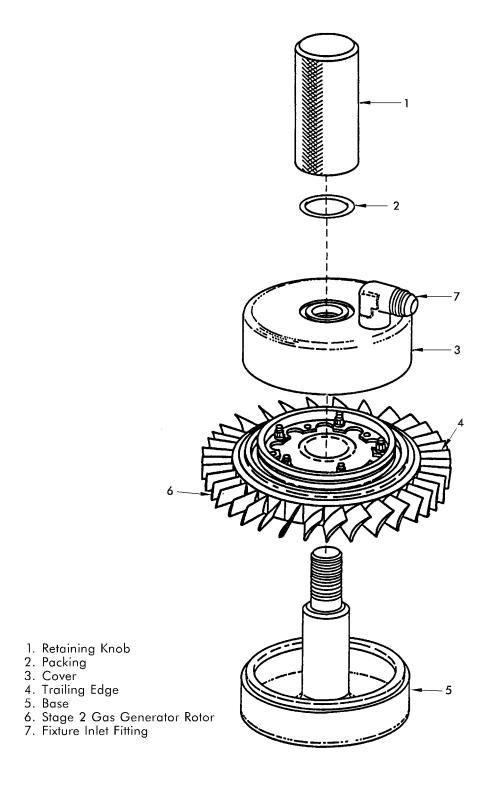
Stage 2 Gas Generator Rotor Forward Pressure Flushing Fixture 21C7730G01
